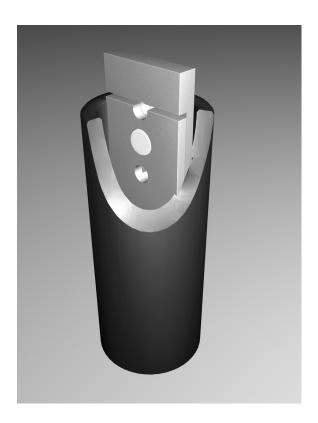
Schematical representation of the test fixture. The two-plate specimen assembly fits precisely in the diametrically opposed grooves. Therefore movement of the jig was only possible in one direction, ensuring a pure shear force.
